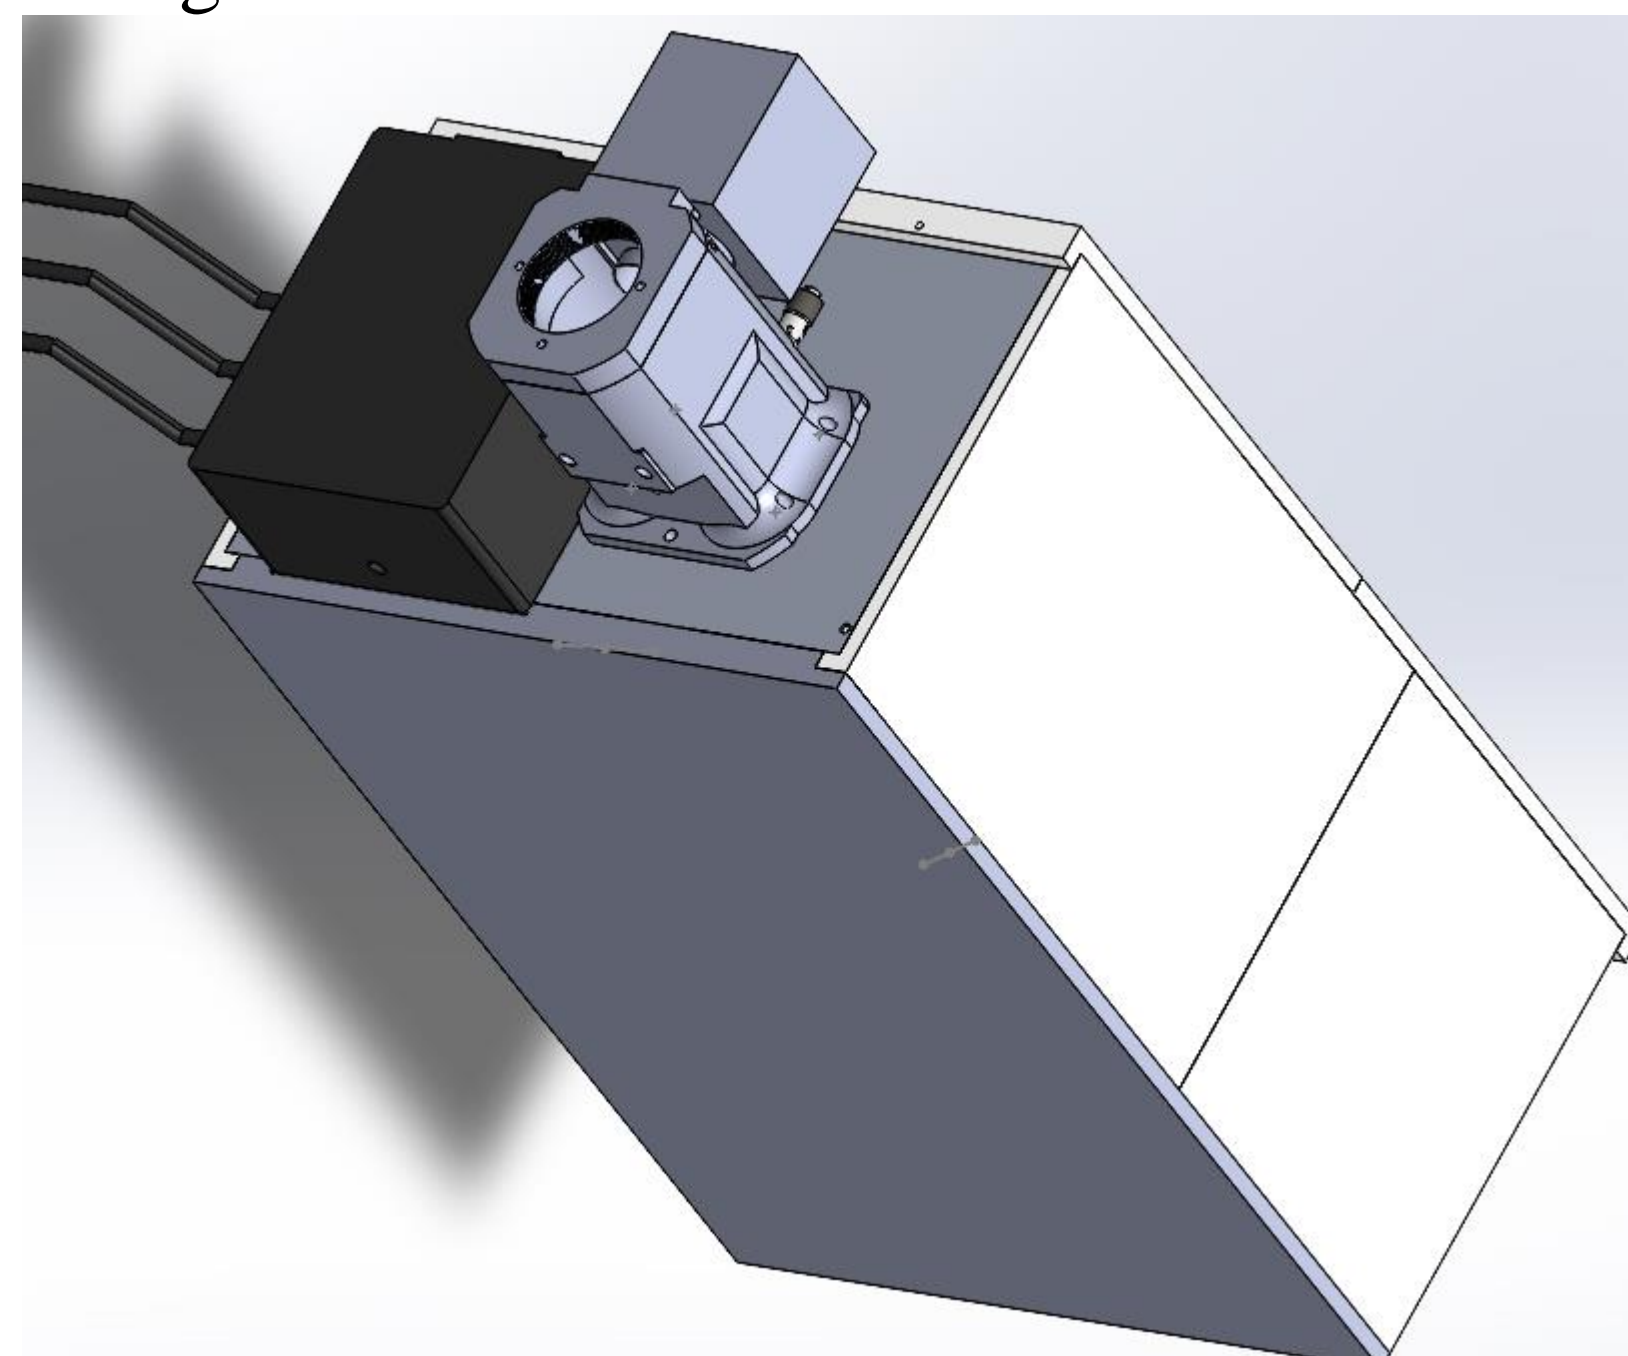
Outside view of the case, interface, and detector. The interface has already been manufactured, and the case will be 3d printed out of PETG (polyethylene terephthalate glycol) as a final step for assembly.
